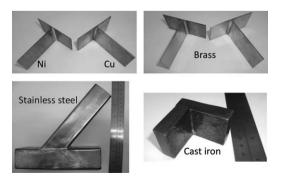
Images of metal samples bonded by soldering using the DES *Reline* as a flux and a tin based solder; Ni and Cu (*top-left*), brass (*top-right*), stainless steel (*bottom-left*) and cast iron (*bottom-right*) with a tin based solder. All show even and homogeneous solder wetting.
